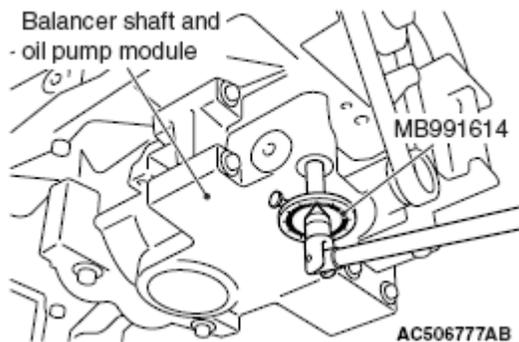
Identifying Balancer Shaft And Oil Pump Module
